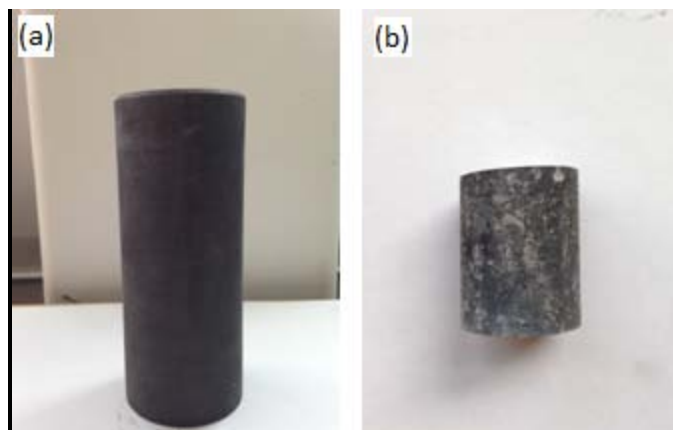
Photographs of (a) graphite die used for casting; (b) as-cast sectioned specimen of Z2 alloy
